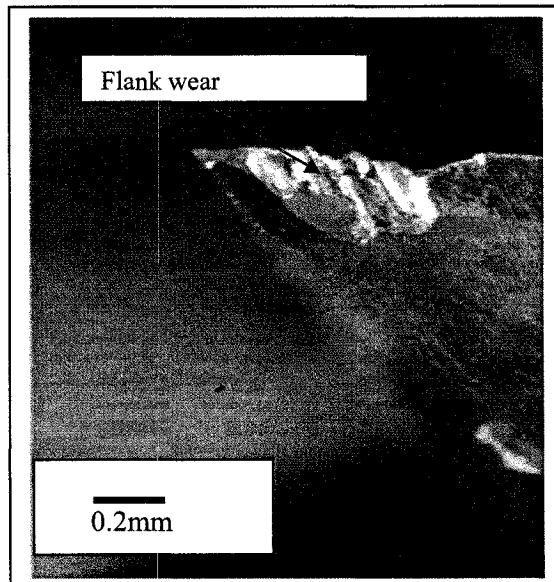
Wear surface, cutting speed= 70 m/min (1170 rpm), depth of cut = 1.2 mm , feed = 0.025 mm/tooth, stable cut
